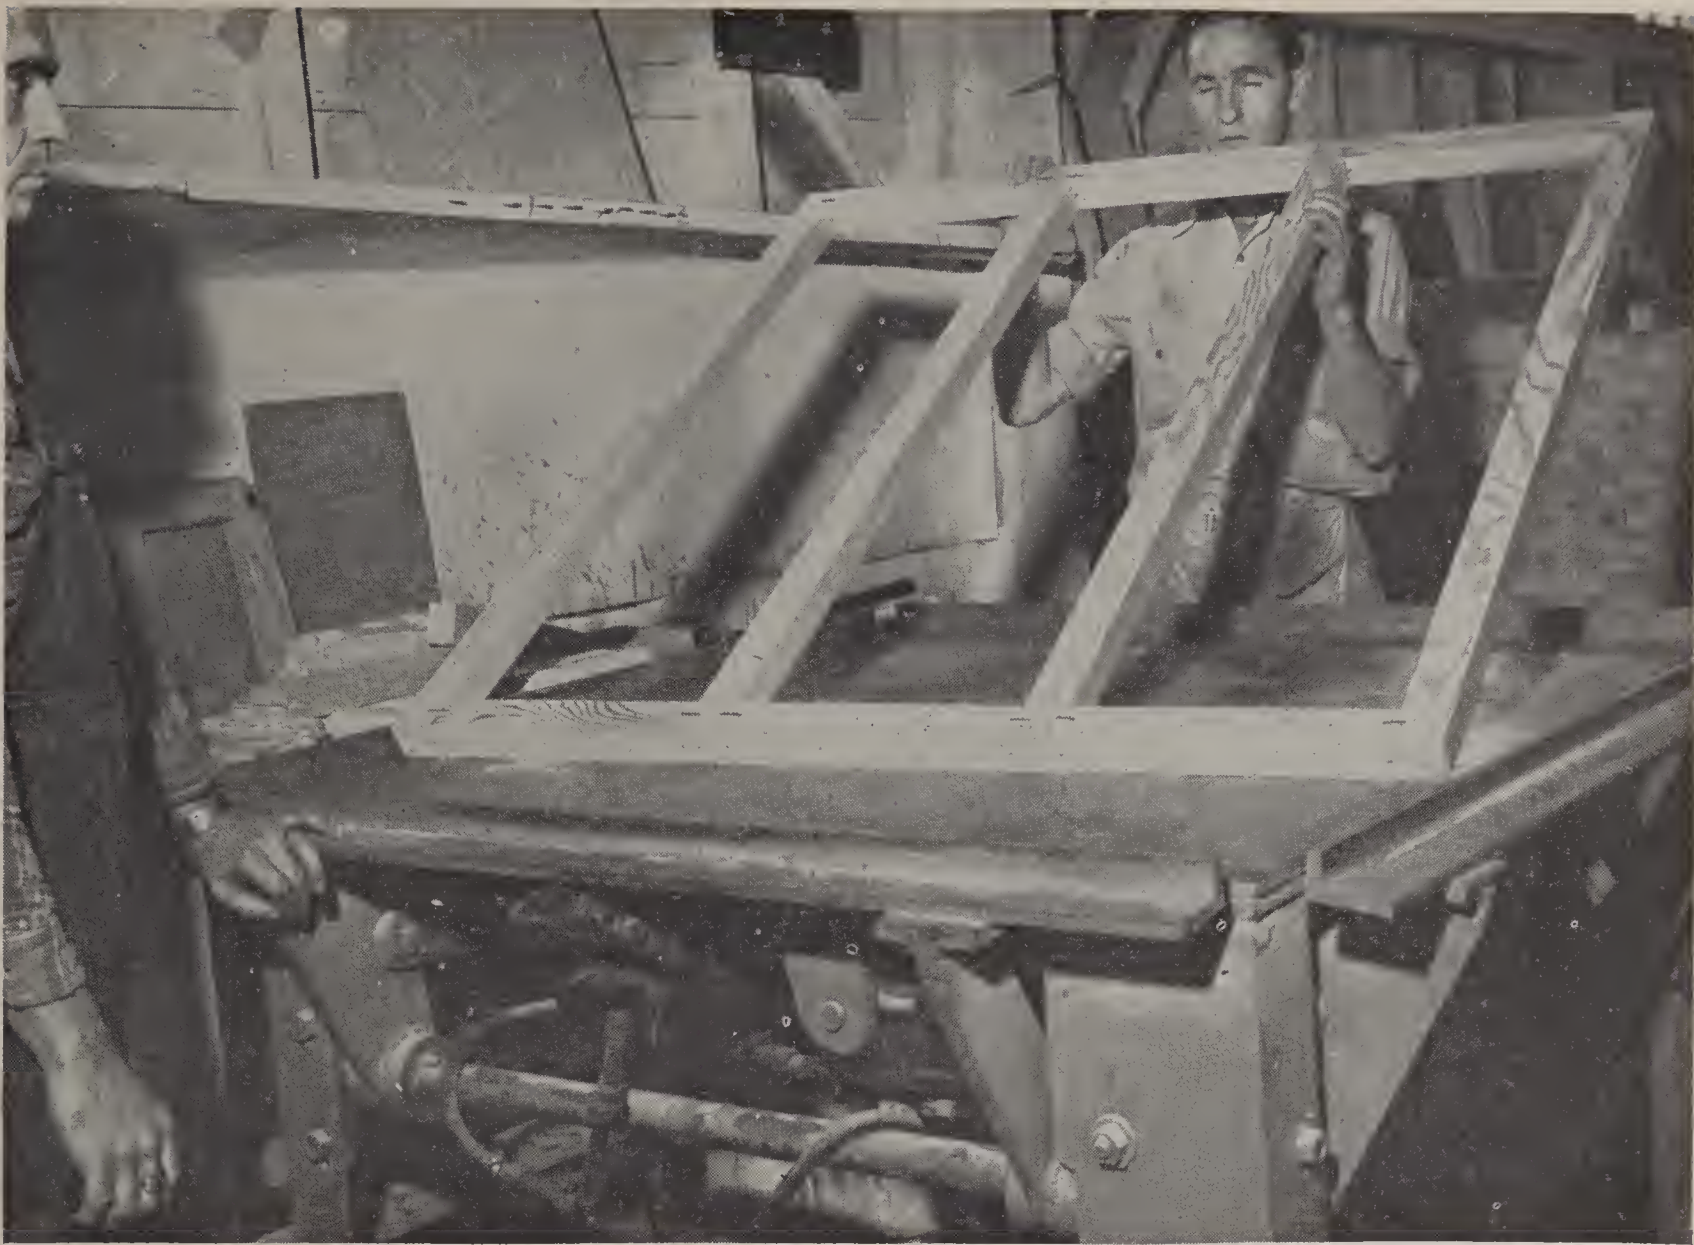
Panel frame assembled on a clamp-type jig. Corrugated fasteners used.
